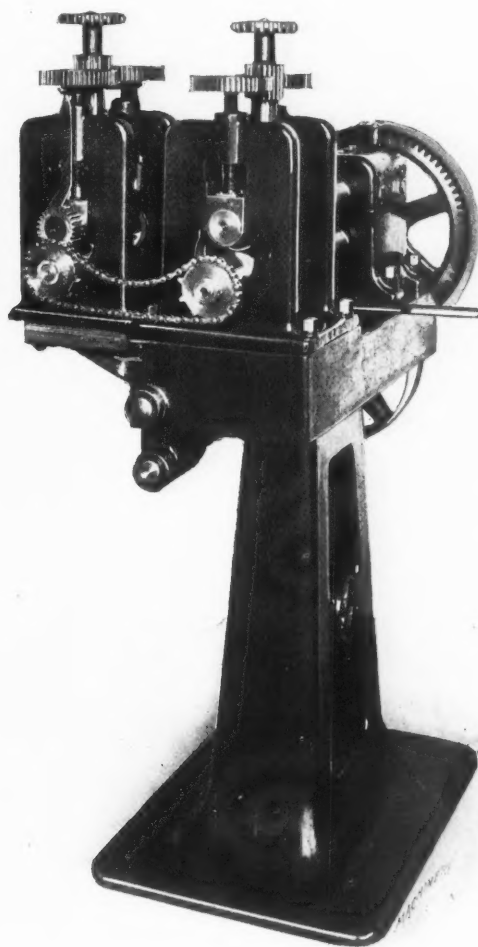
Side View of Machine showing Chain Drive and Auxiliary Roll Frame
